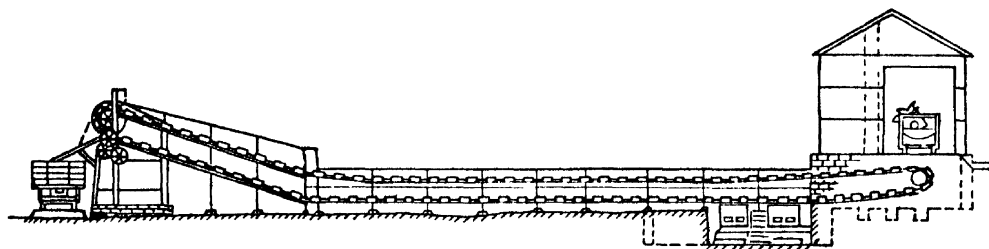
IX.—A pig casting machine. (After Stoughton.)
